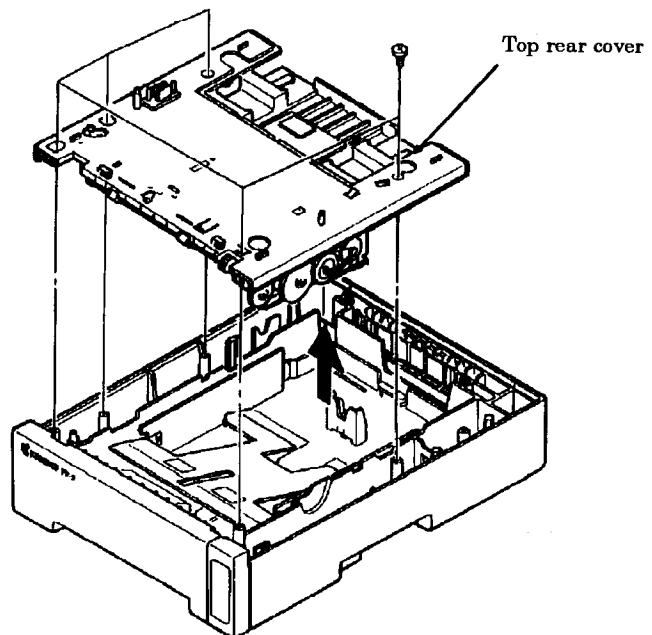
REMOVING THE TOP REAR COVER
